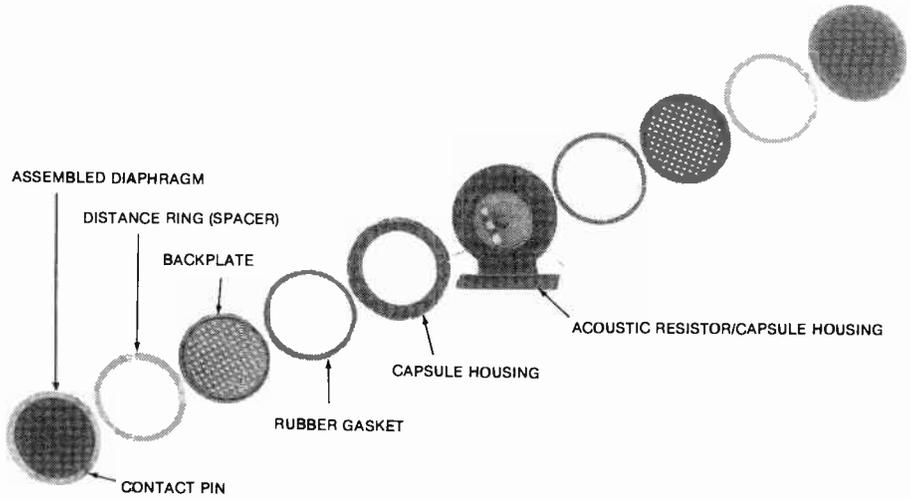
Single-membrane cardioid condenser capsule showing damping holes and rear backplate perforations.
